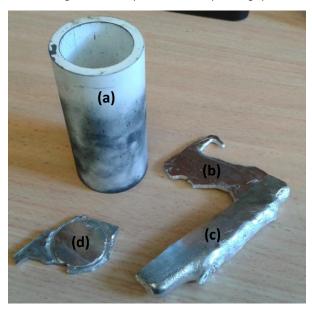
(a) Crucible for induction furnace melting of alloys, (b) cracked amorphous plate, (c) riser cut free from main casting, and (d) drilled and partly shaped target.
